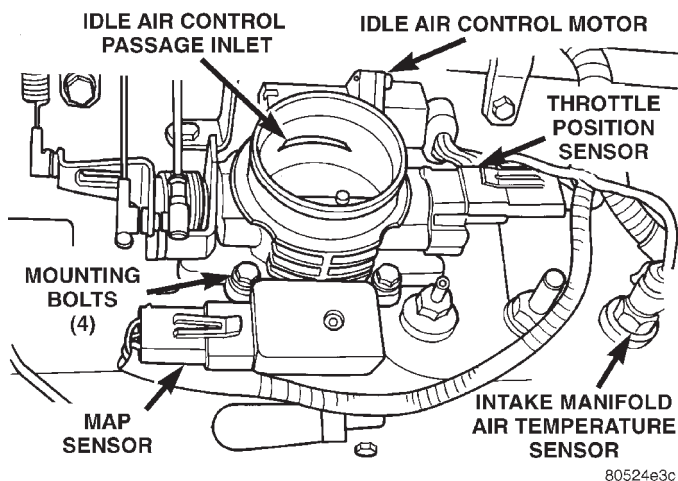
Throttle Body and Sensor Locations—4.0L Engine
